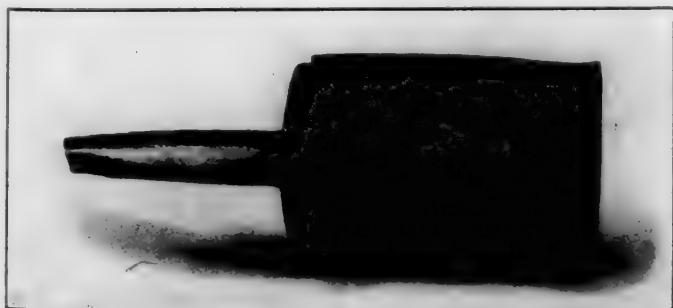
A Helical Reamer Made of Thermit Steel and High Speed Blades
